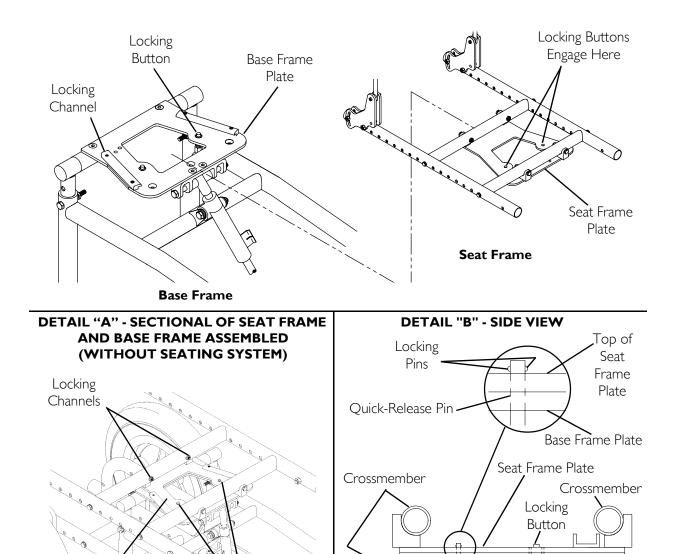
Assembling/Disassembling the Removable Orbit Wheelchair
